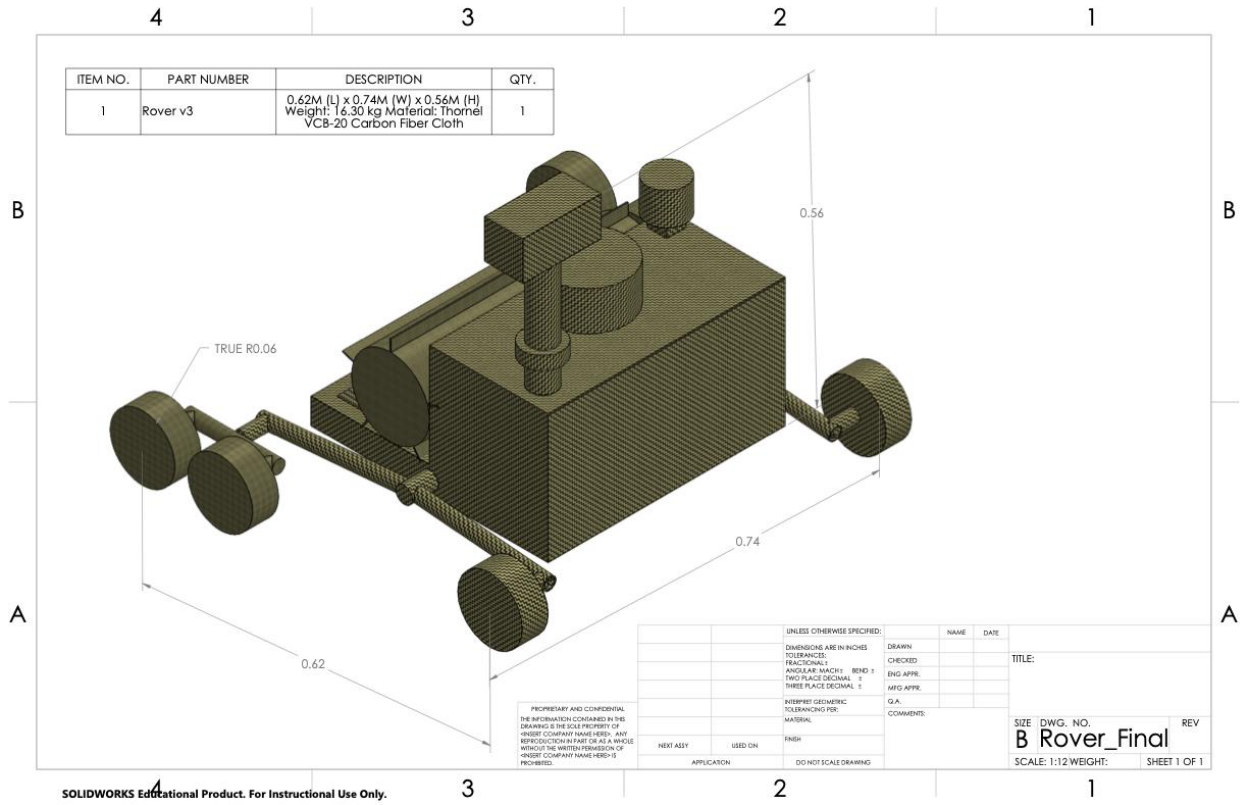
CAD drawing of entire ARES-42 rover assembly 0.62 m (L) x 0.74 m (W) x 0.56 m (H) Weight: 30 kg Material: Thornel VCB-20 Carbon Cloth
